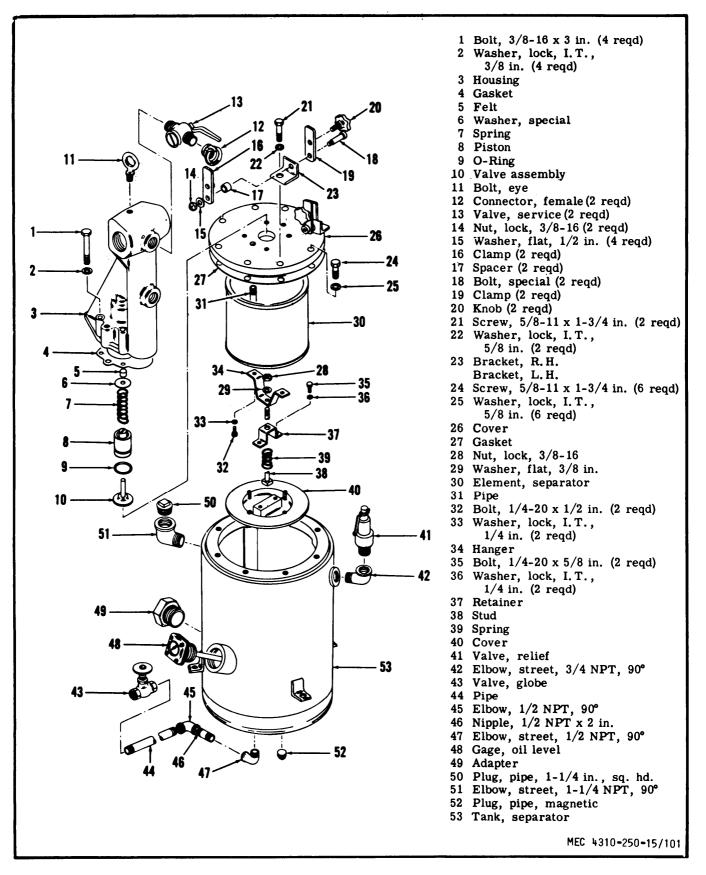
Oil Separator Assembly, Disassembly and Reassembly.
